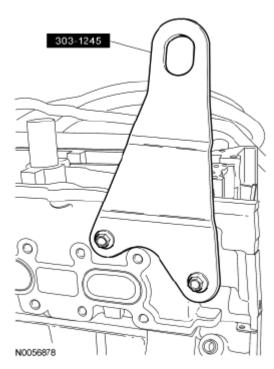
Identifying Engine Lift Eye Courtesy of FORD MOTOR CO.
